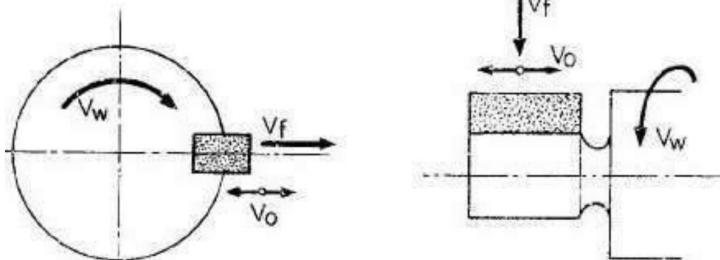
Super finishing of end face of a cylindrical work piece in radial mode
